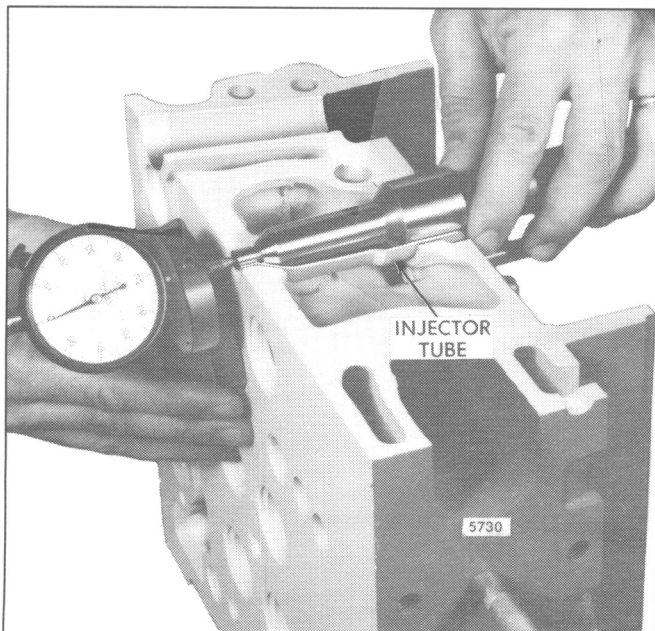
Measuring Relationship of Bevel Seat of Injector Tube to Fire Deck of Cylinder Head with Tool J 25521 and Gage J 22273
